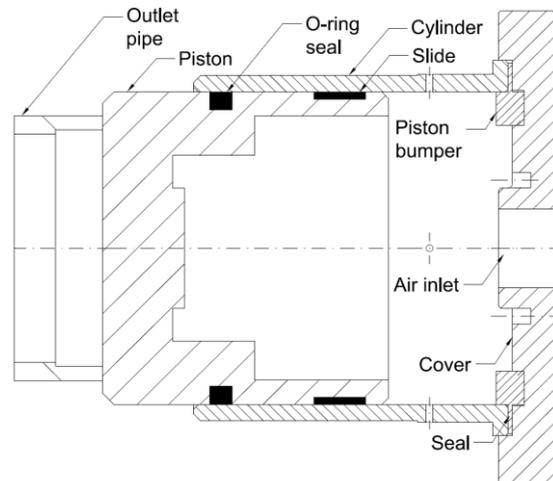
Cross section of the piston in the cylinder and discharge pipe
